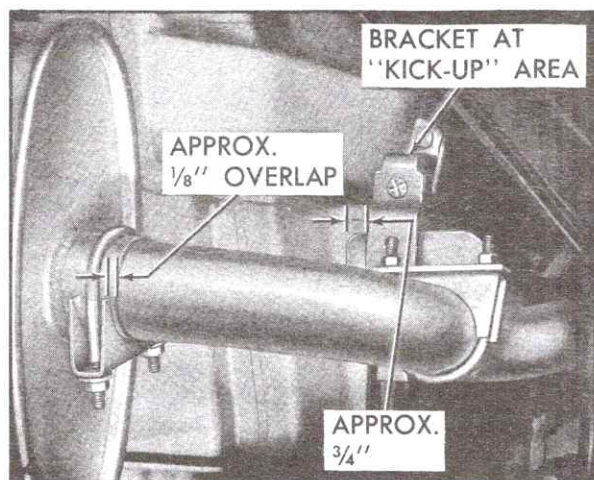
Muffler Outlet Pipe at Kick Up Area
